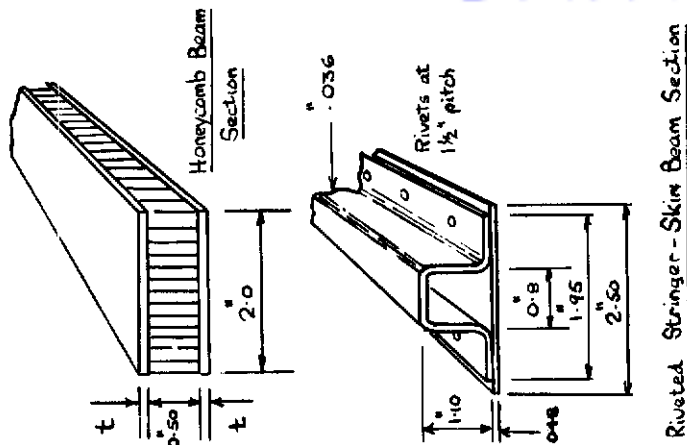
DAMPING RATIOS OF HONEYCOMB SANDWICH & RIVETED BEAMS
